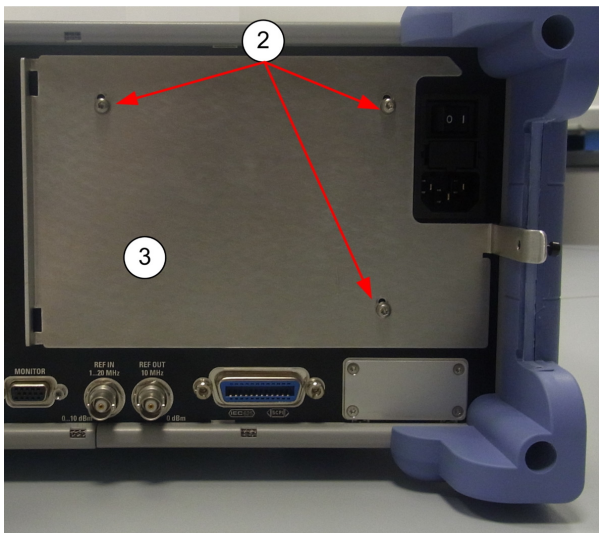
Attaching the holding plate to the rear panel of the instrument
